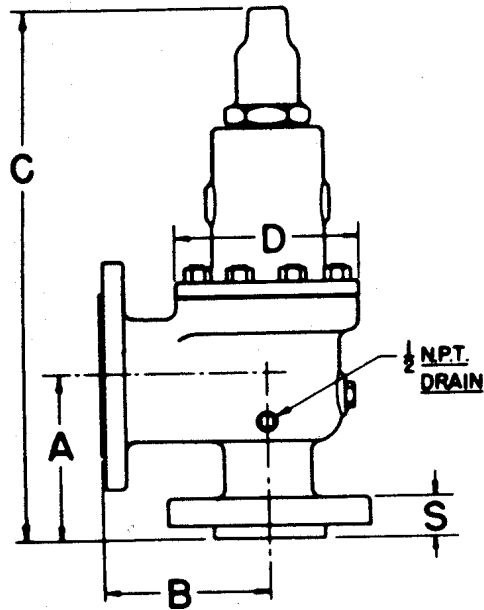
Relief valve body is normally an angle with larger outlet than inlet connection.
